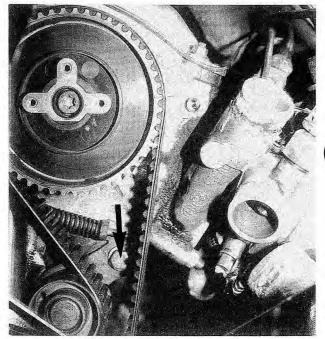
Upper mounting bolt for camshaft drive belt ten-
